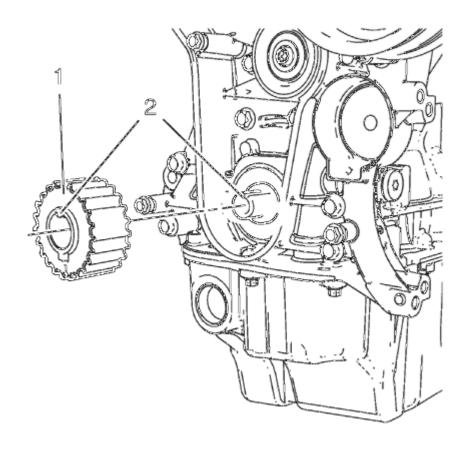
Crankshaft Sprocket Courtesy of GENERAL MOTORS COMPANY
